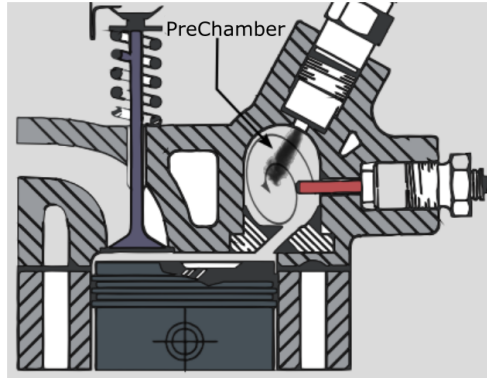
Drawing of a cut-section of an engine block and cylinder in a indirect injection Diesel engine. From [3]
